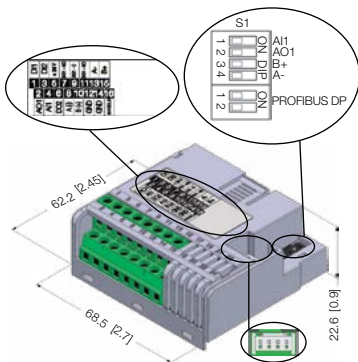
CPDP2 dimensions in mm [in], DIP-switches location and MCard connector
